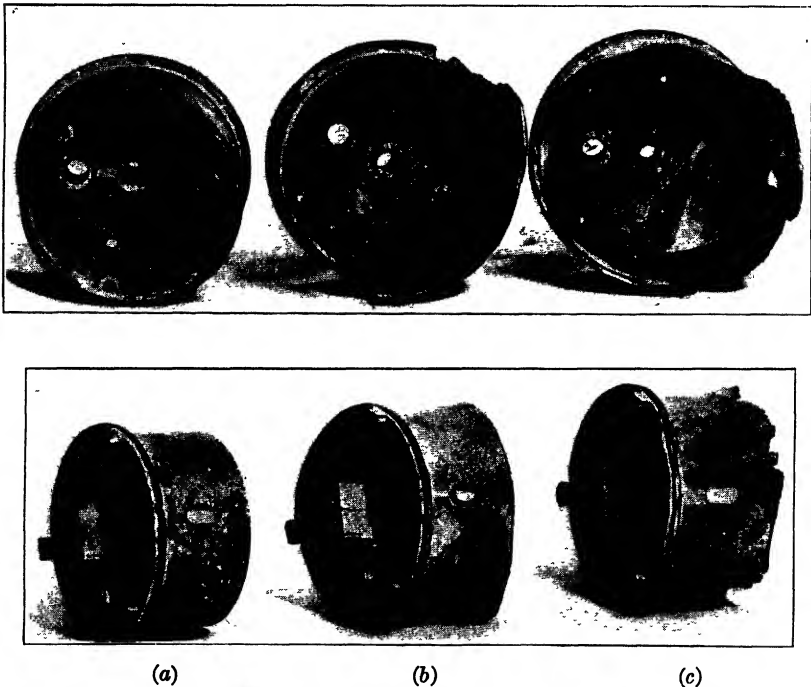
CASTINGS AFTER 4 DAYS EXPOSURE TO STEAM. (a) IS AS GOOD AS CAST, EXCEPT FOR SURFACE OXIDATION; IT HAS EXPANDED AND CHANGED DIMENSIONS LESS THAN CASTING SHOWN IN FIG. 56; (b) AND (c) SHOW EXTREME CRACKING AND DISTORTION. (a) 5 PER CENT. AL, 3 PER CENT. CU WITH HIGH-GRADE ZINC; (b) 5 PER CENT. AL, 3 PER CENT. CU WITH "PRIME WESTERN;" (c) 12 PER CENT. AL, 3 PER CENT. CU WITH "PRIME WESTERN."
